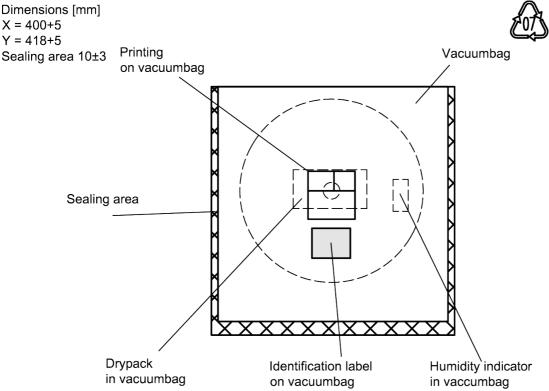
Drawing of moisture barrier bag (MBB) for reel with diameter of 330 mm.
